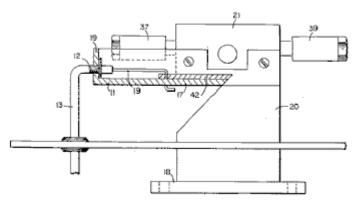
is a top view of the air intake valve to fuel mixing chamber.
